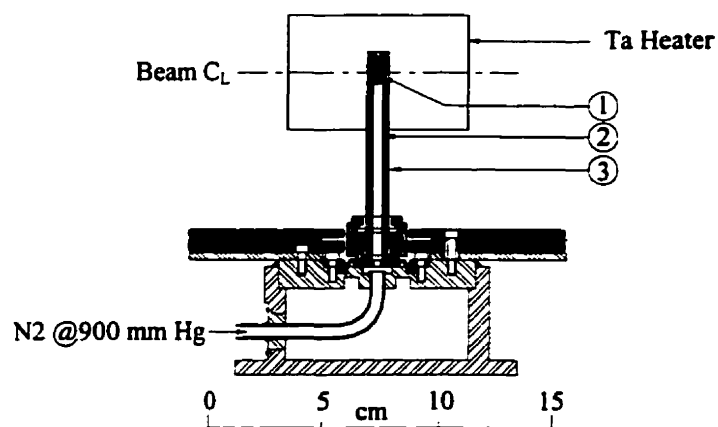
Detailed drawing of the circled parts in Figure 7-6; (1) sample capsule, (2) molybdenum sample support and (3) molybdenum pencil tube.
